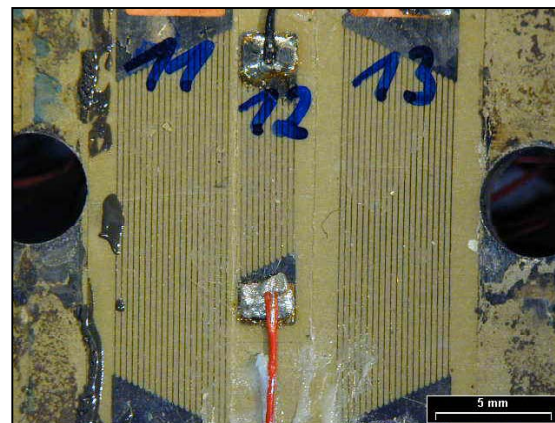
Specimen 2-B-80, crack wire foils no. 11, 12 & 13 between drilled holes
